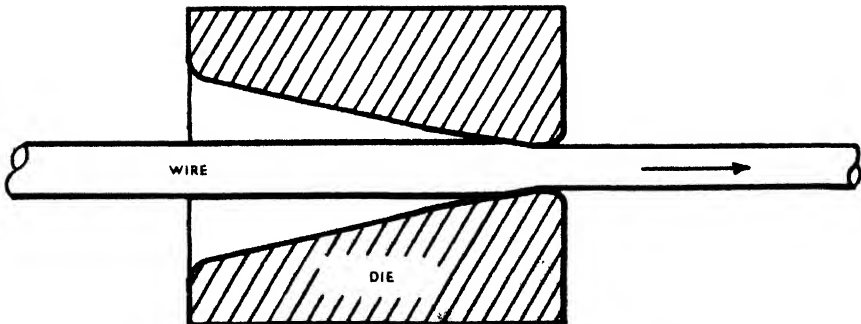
B. DRAWING A WIRE THROUGH A DIE.
